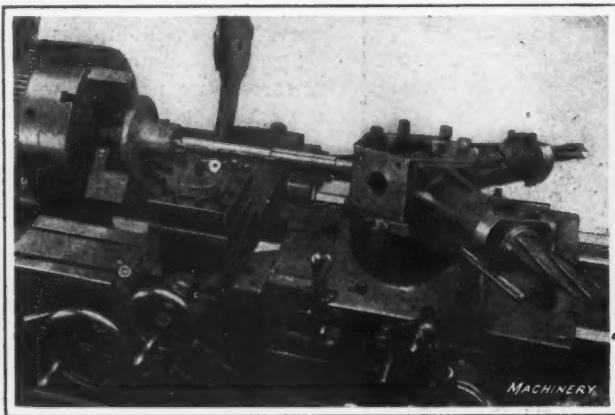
Machine set up for performing First Operation on Wheel Hub
